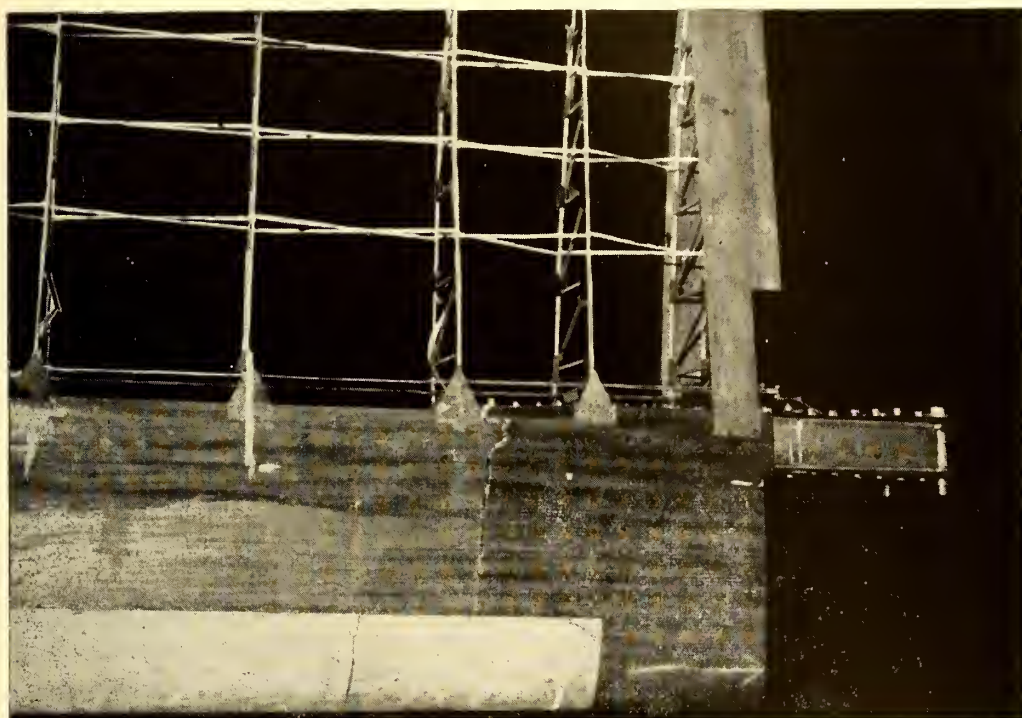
Static Test Wing Showing Tension Failure of Plywood Covering.
